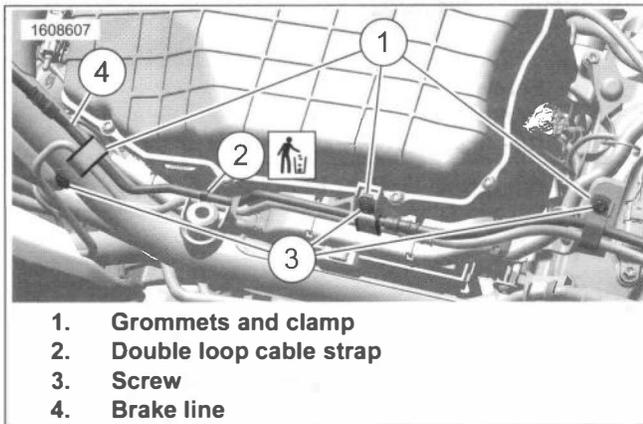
Left Side Brake Line From Front Master Cylinder
